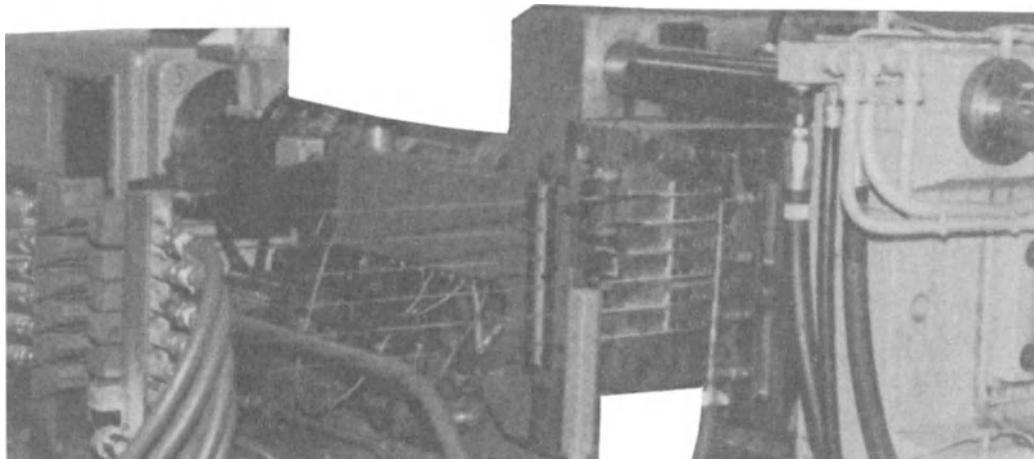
View of the mold in the open position showing molded buttons on wires that have just been molded as they travel to the left.
